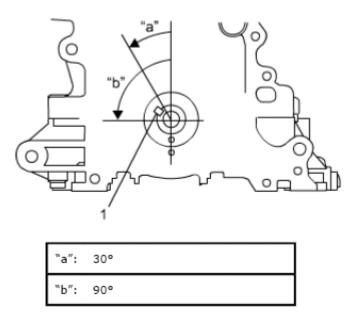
Identifying Crankshaft Key Position Courtesy of SUZUKI OF AMERICA CORP.
